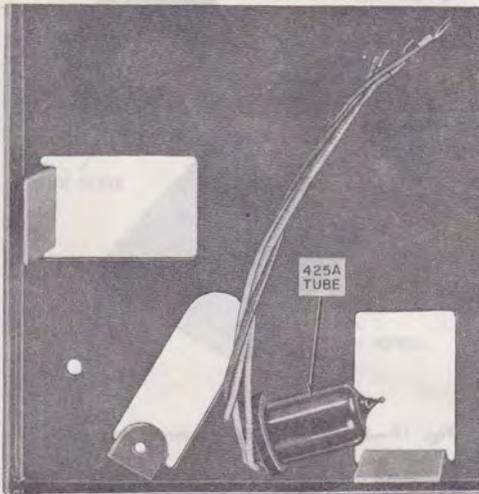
Installation of Cold-Cathode Tube on Base Pan Assembly
